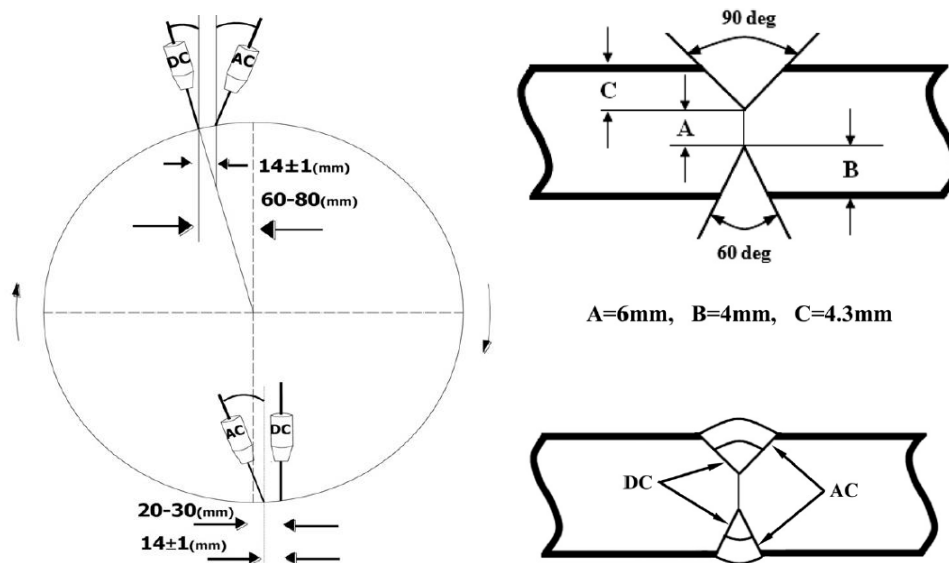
The geometry of groove weld and welding torch arrangement for spiral WS of API-X65 pipe [30]
